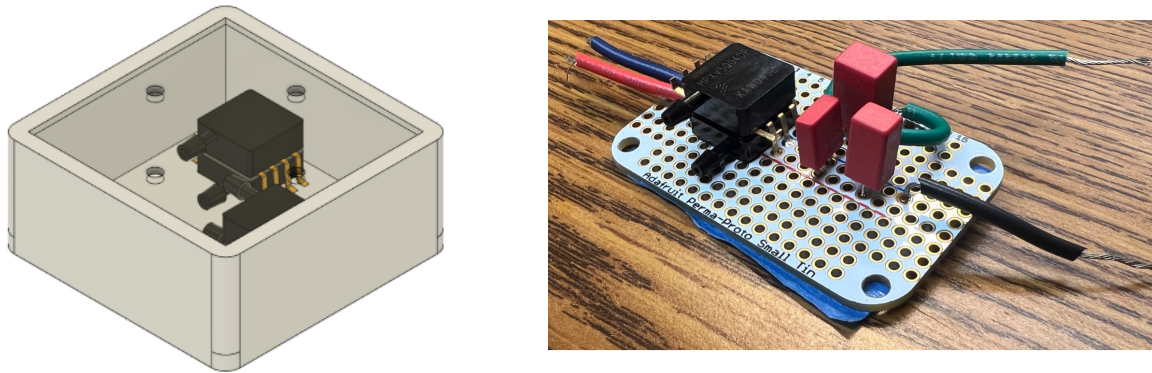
Left)* Simplified 3-Dimensional Model of Hydrodynamic Sensor Module. *Right)* Solder Board Module Prototype
